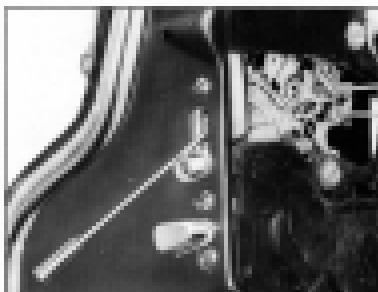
Engaging "Free Wheeling" Device ('58 and '58 Sedan)
